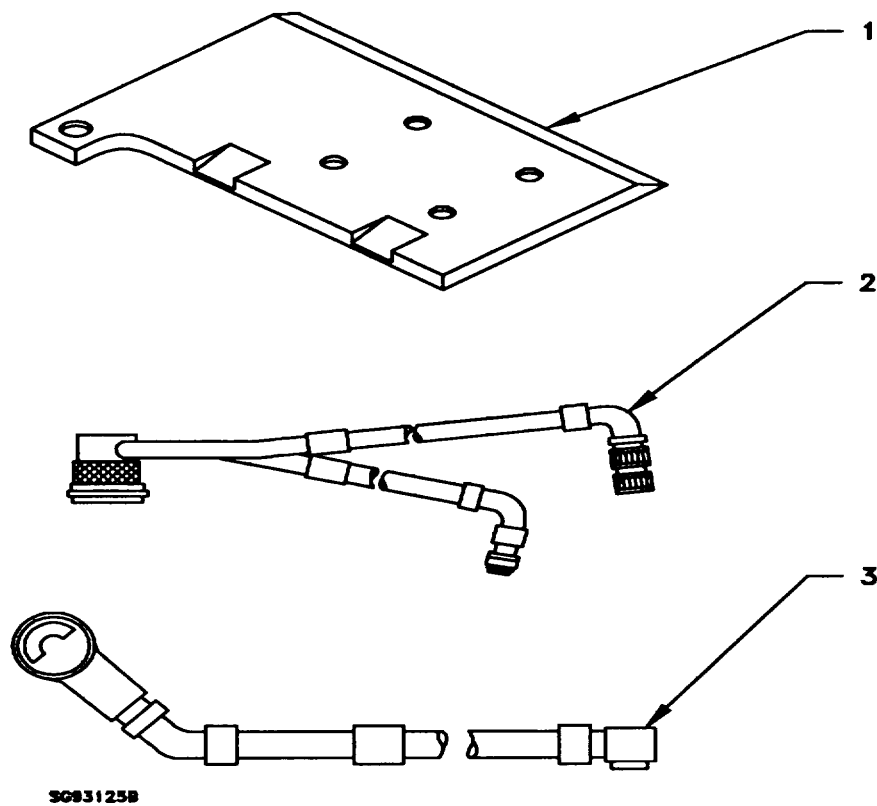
TSEC/KY-57 Illustrated Parts List
